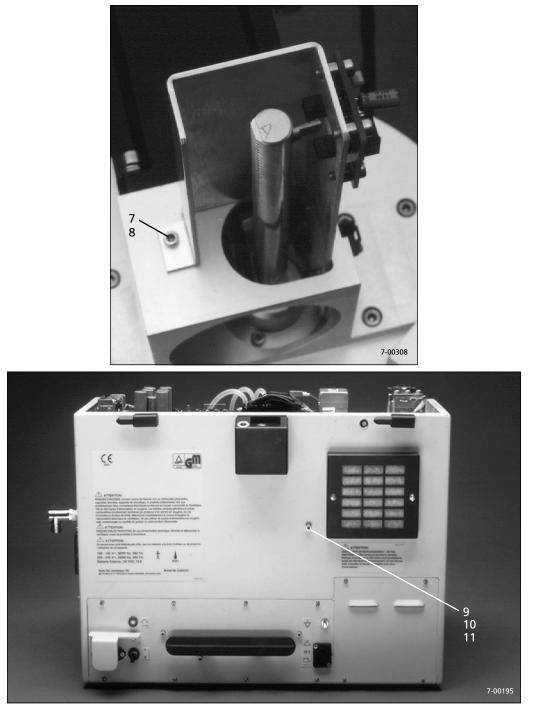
Piston/cylinder and motor/encoder assemblies (Sheet 2 of 2)
